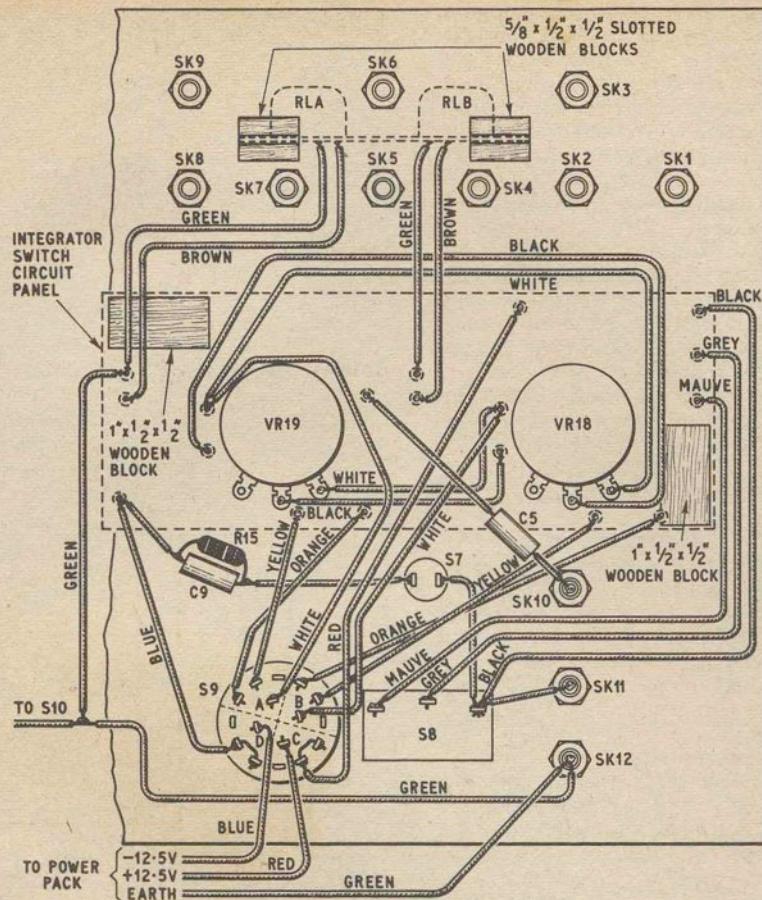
Rear view of UNIT "B" front panel showing integrator switch wiring
